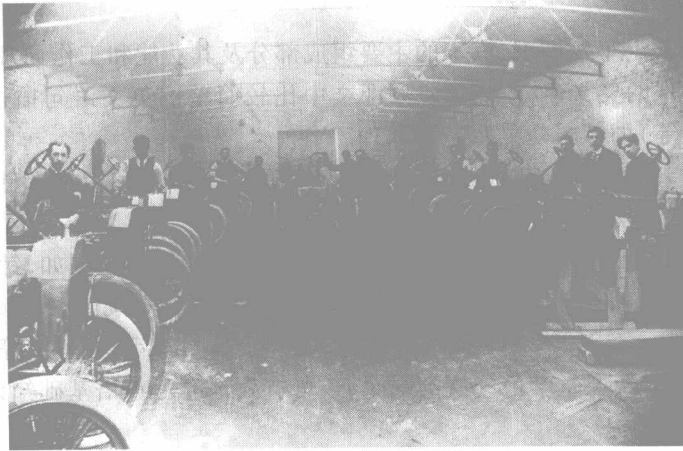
Early vehicle assembly workshop of Ford Automotive Co. in Dearborn.
